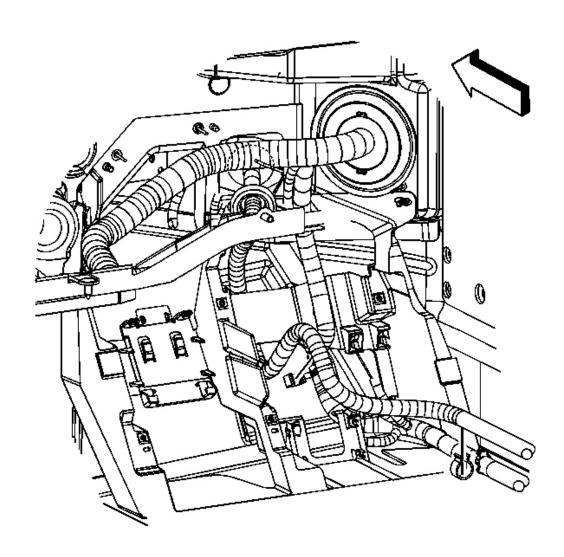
View Of Positive Cable & Grommet Courtesy of GENERAL MOTORS CORP.
